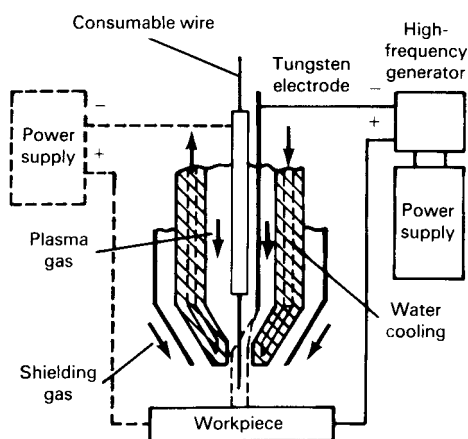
Schematic of plasma gas metal arc welding equipment. Source: Ref 1
